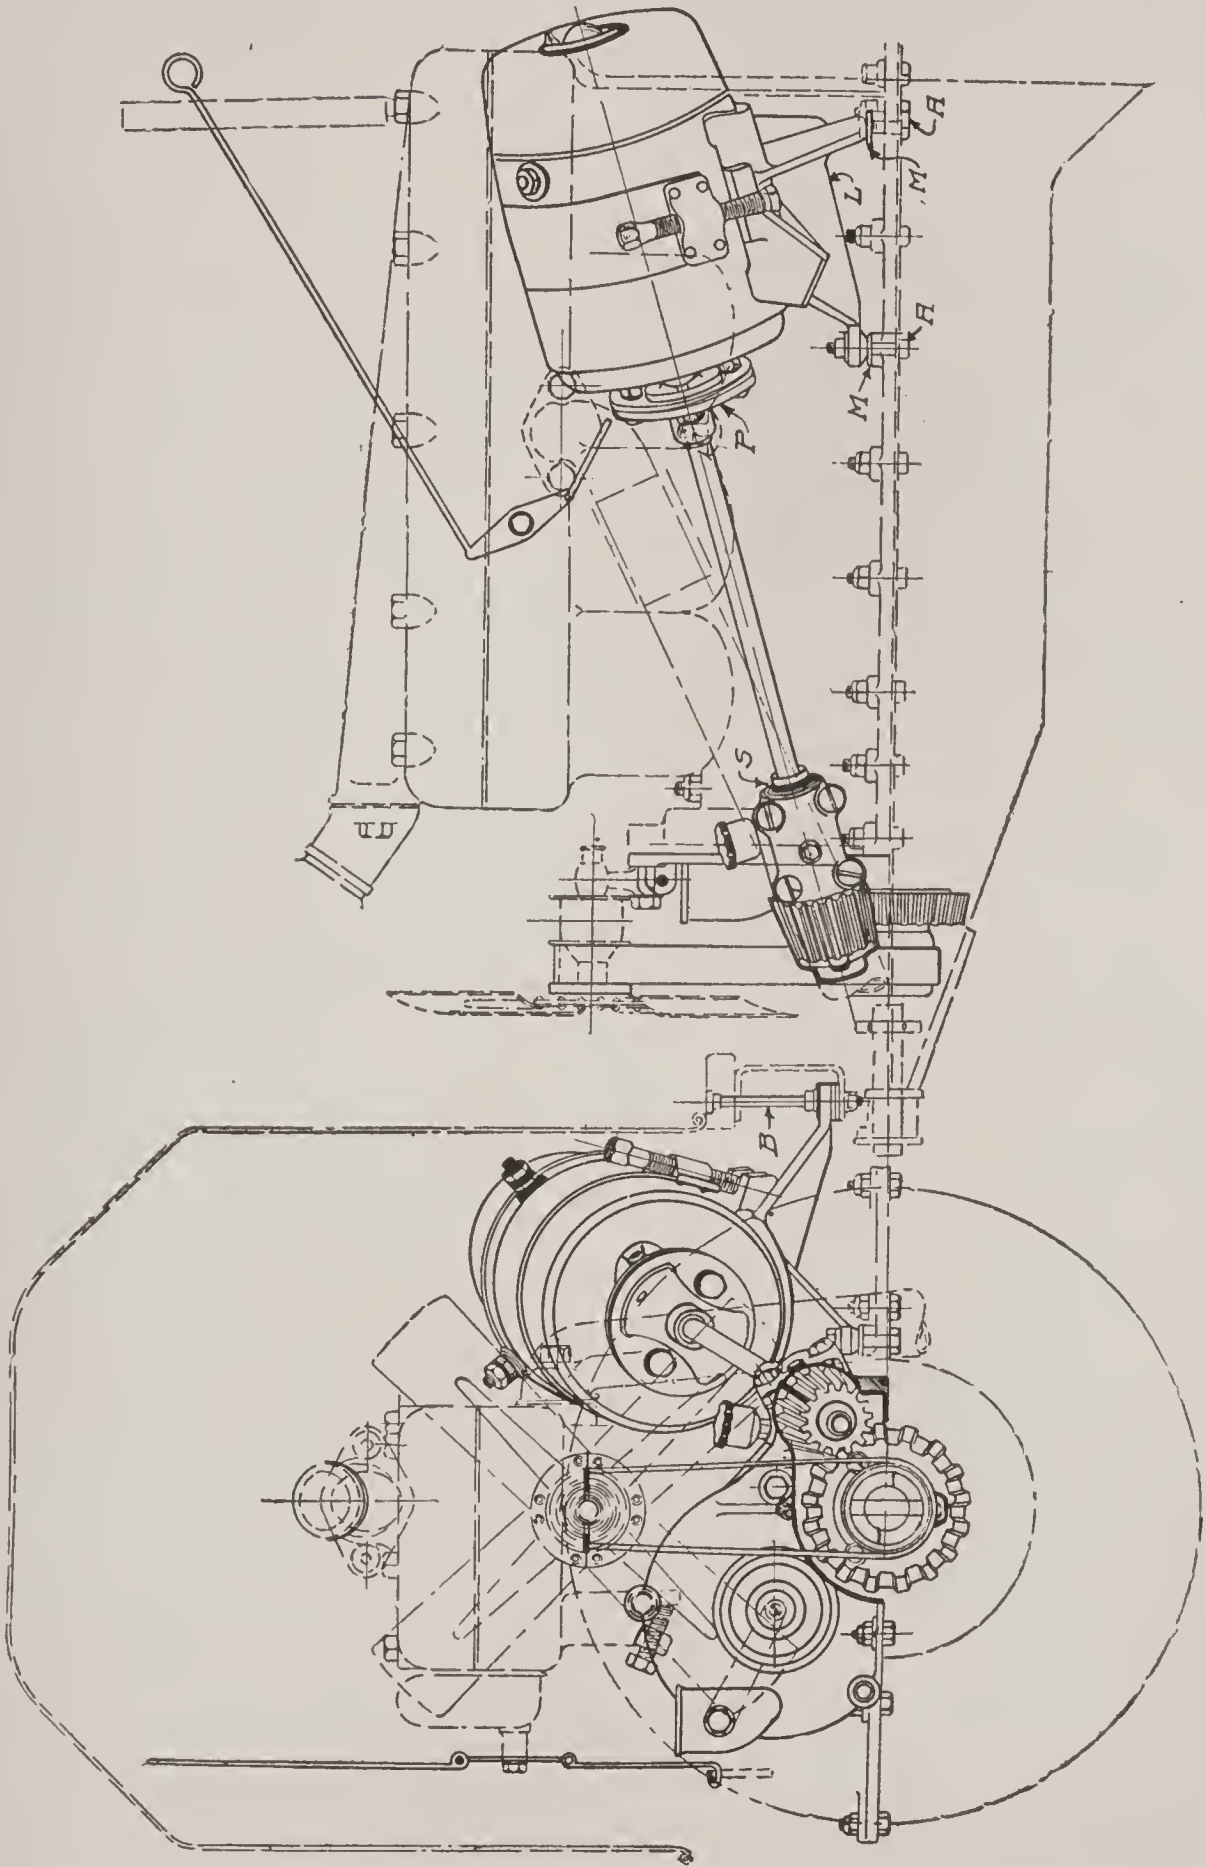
End and Side Elevations of Motor and Driving Shaft
